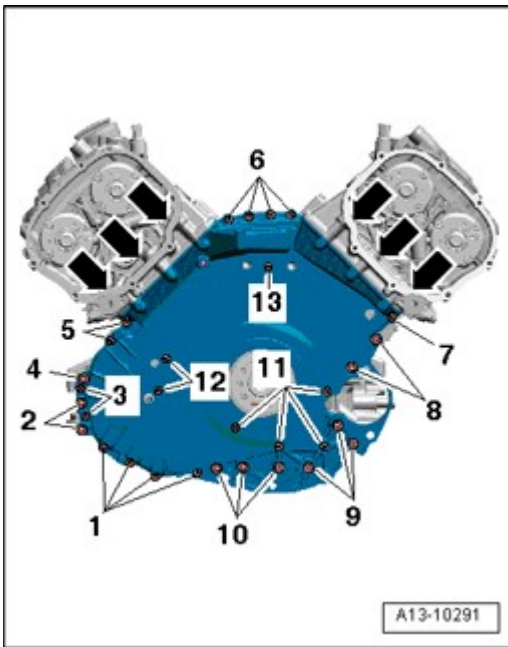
Removing/Installing Bolts And Lower Timing Chain Cover
